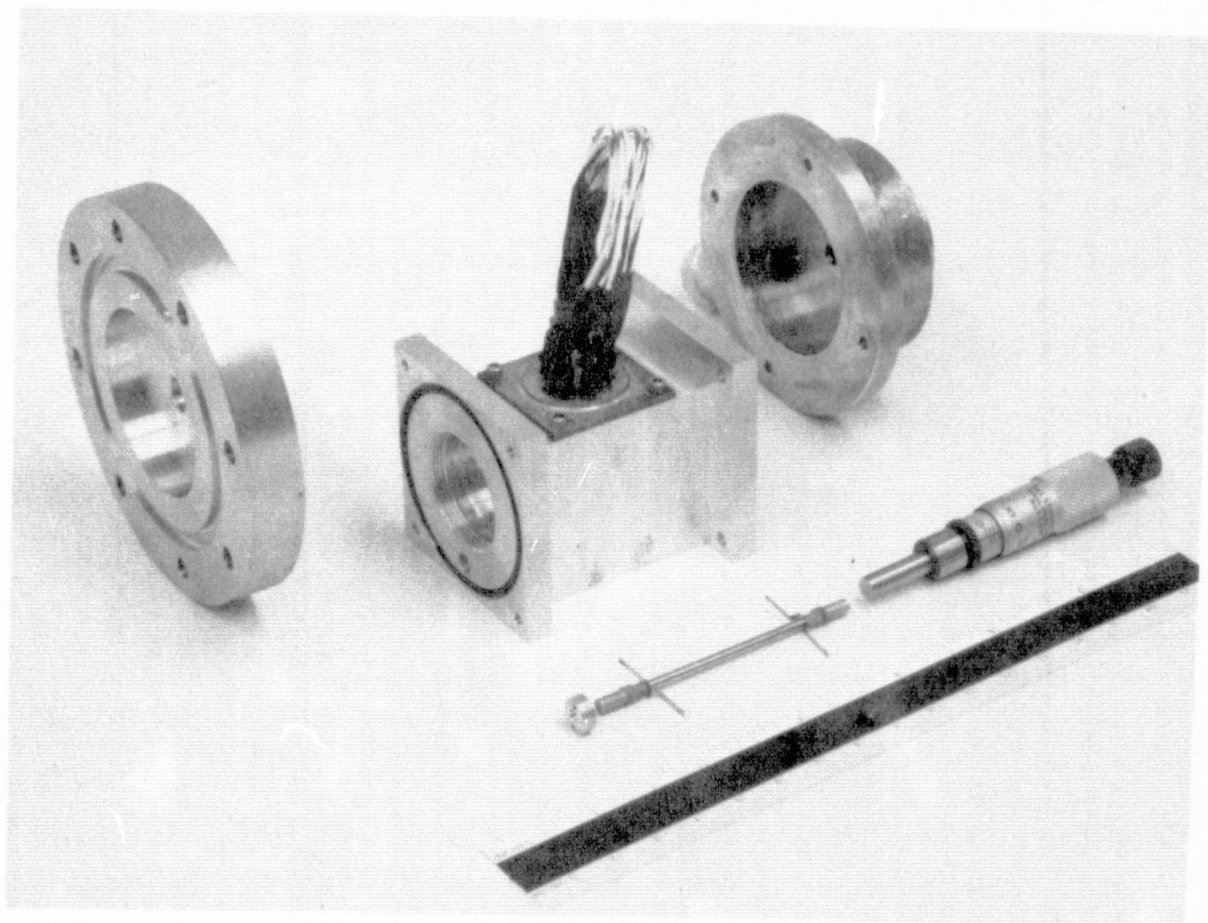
Stanford Thrustor Test Arrangement Disassembled
